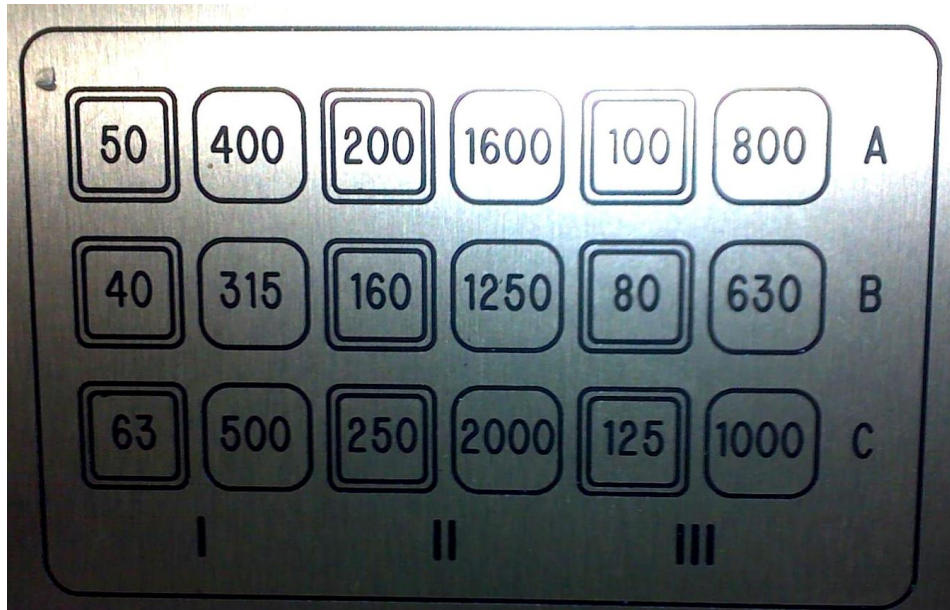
Figure shows the preset input of spindle speed in Excel FU281 Universal Milling Machine
